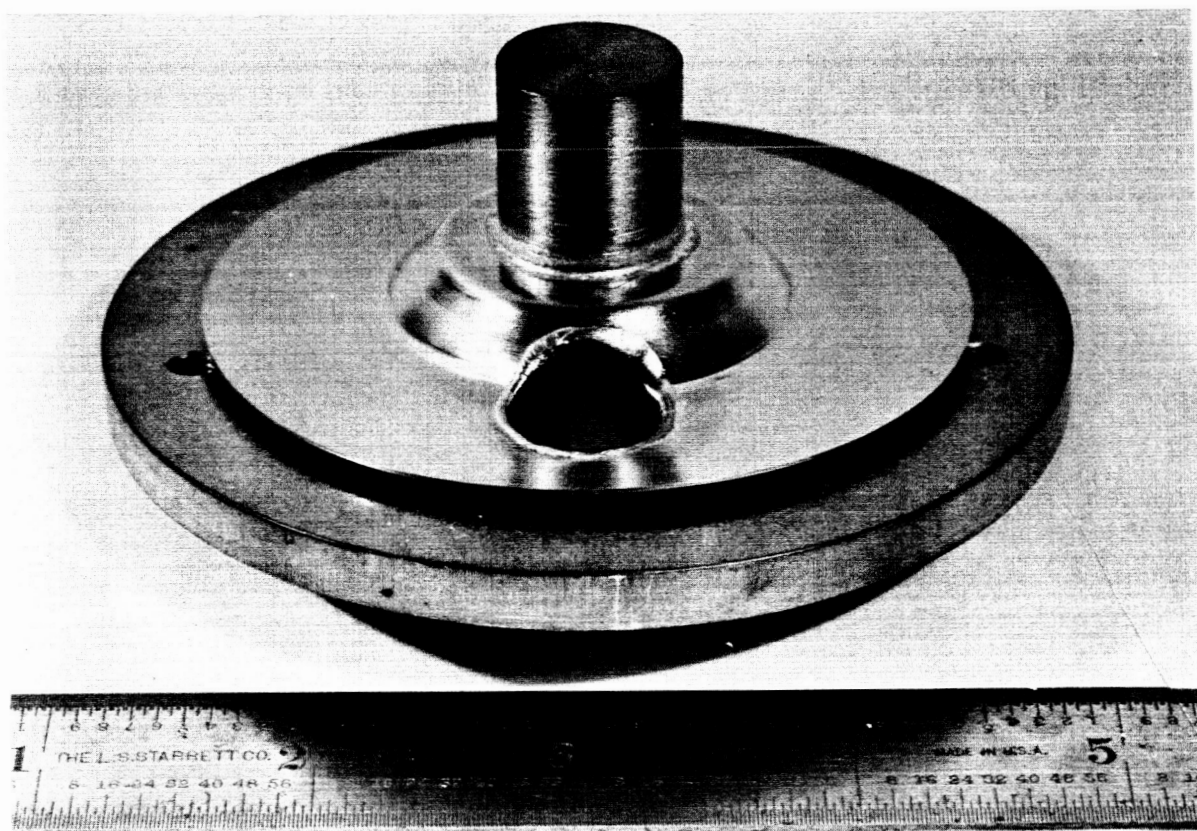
Lower Flange Sub-assembly for Vacuum Capsule Including Molybdenum Contact, Rodar End Dish with Tube for Ion Pump Connection, and Amzirc Flange.
